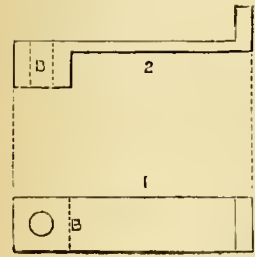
BLOCK FOR ECCENTRIC CHUCK. 1, Plan. 2, Section.
